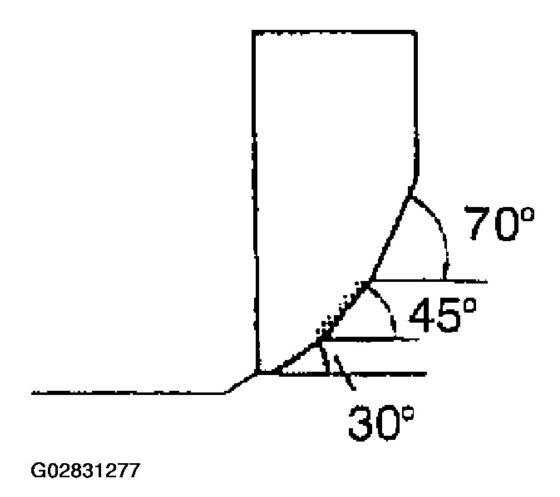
Centering Valve Seating Position Courtesy of MAZDA MOTORS CORP.
